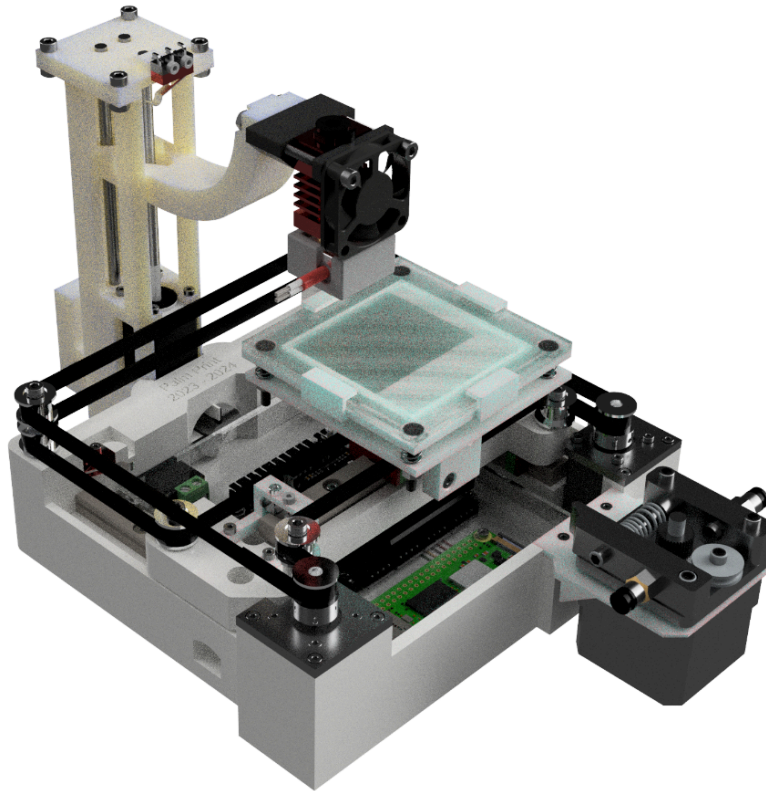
Fusion 360 Linear Guide Rail Assembly Render - Isometric
